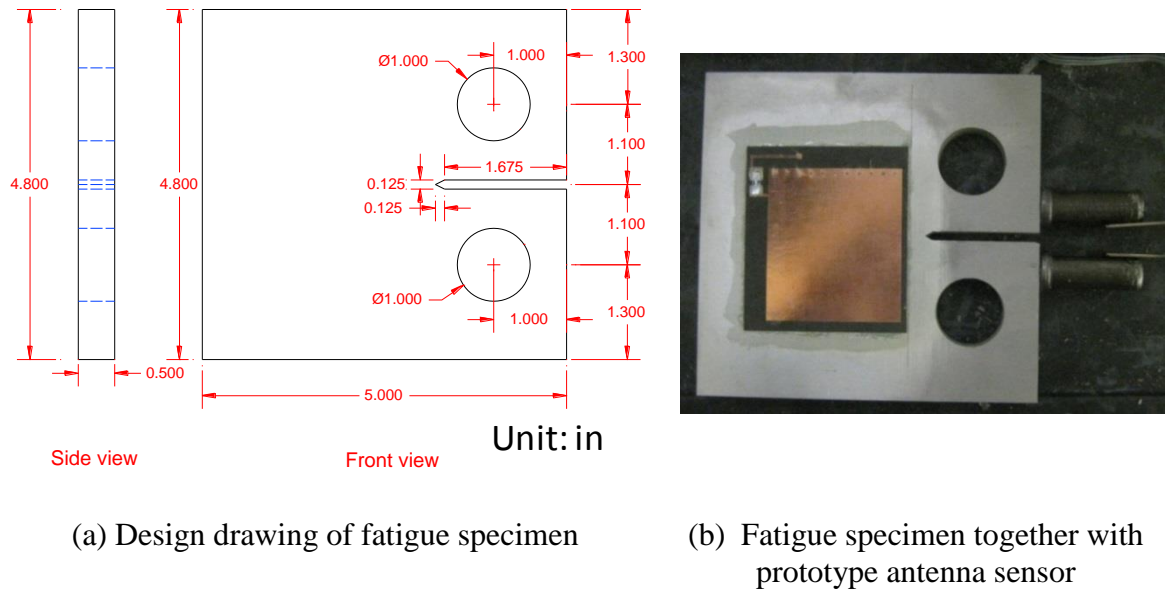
Design drawing and photo of a fatigue test specimen
